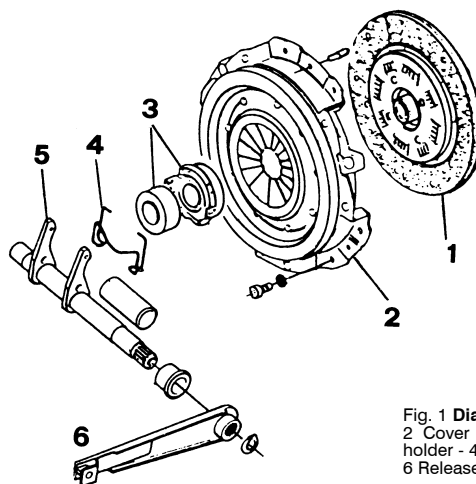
Diaphragm clutch: 1 Clutch disc - 2 Cover assembly - 3 Release bearing with holder - 4 Retaining spring - 5 Release fork - 6 Release shaft lever.
